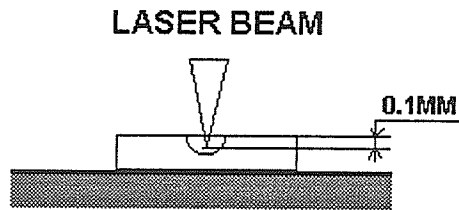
Focusing position in laser welding AISI316 stainless steel sample.
